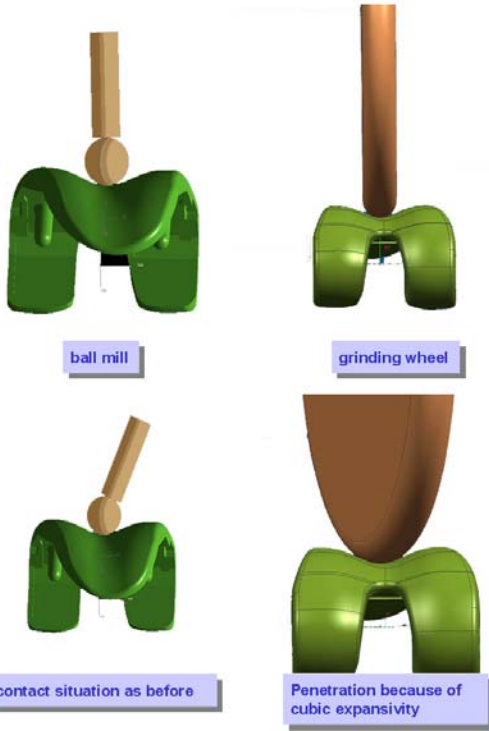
Differences between a ball mill and a grinding wheel in a CAM system
